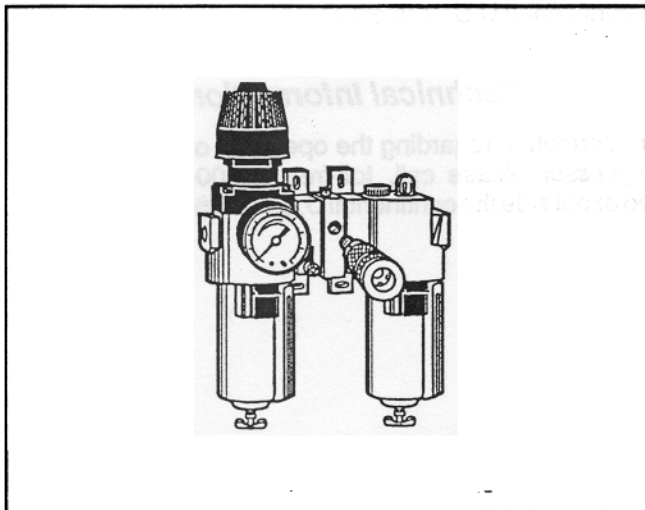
Filter/Regulator/Lubricator (PA2078)
